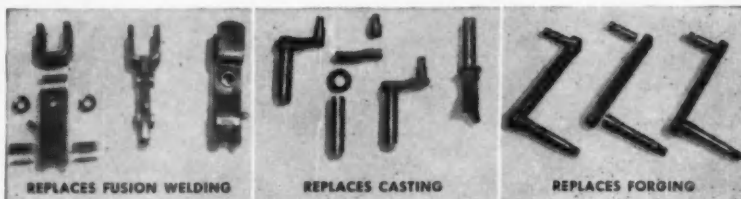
Typical assemblies resistance welded on Sciaky equipment at M-H-F.
